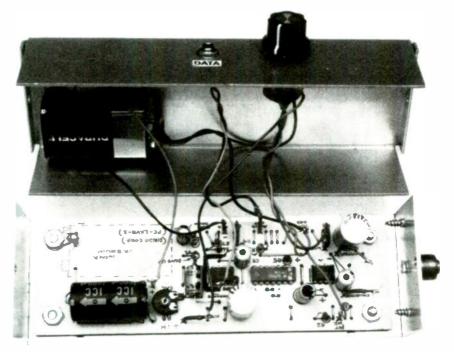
A COMPONENT-POSITION TEMPLATE cemented to the pre-drilled PC board will simplify
